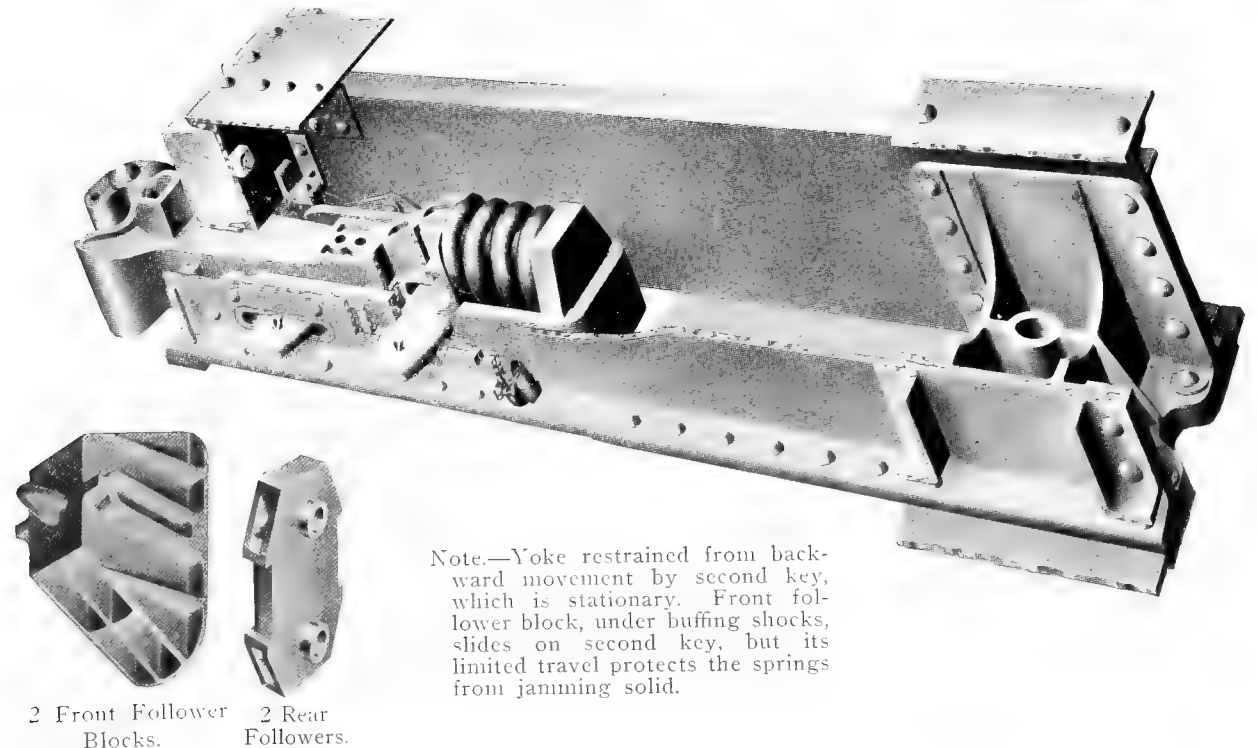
Farlow Three-Key Draft Attachment for Use with M. C. B., Class G, 8 in. by $7\frac{7}{8}$ in. Twin Springs, and Parts for One Car.
